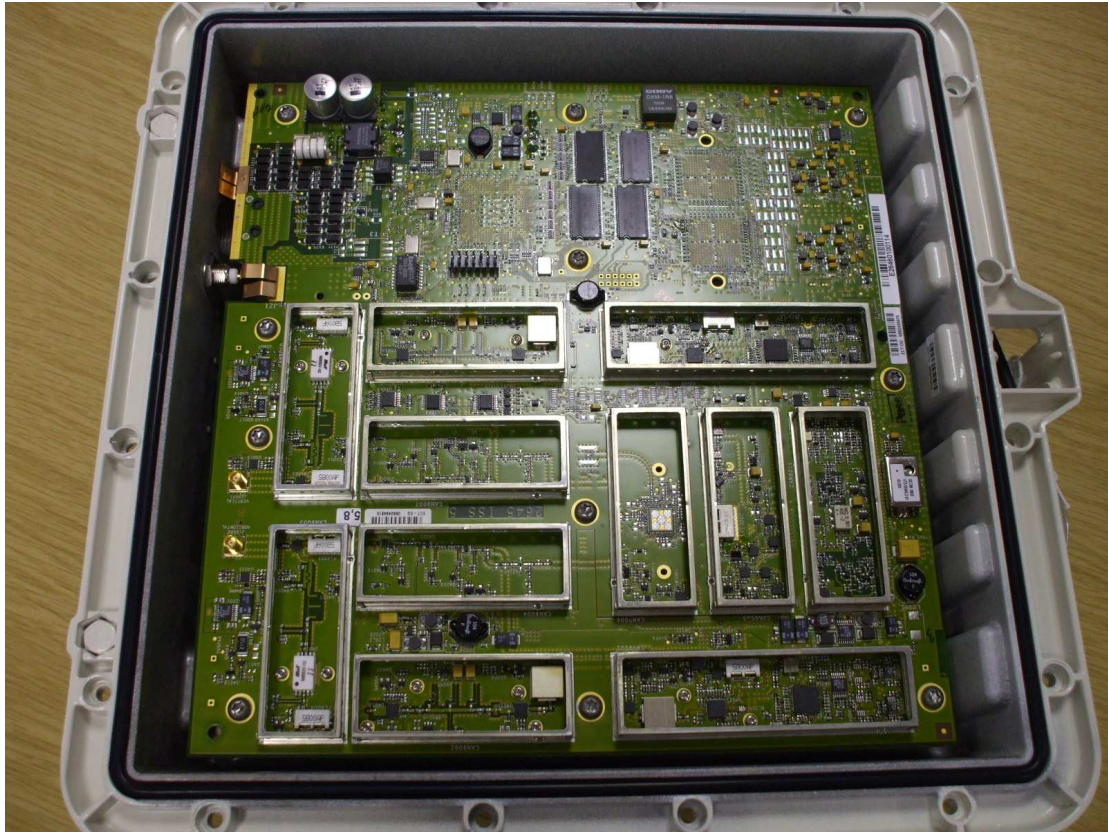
PTP5xx00 with cover plate and screening cans removed to show internal assembly
